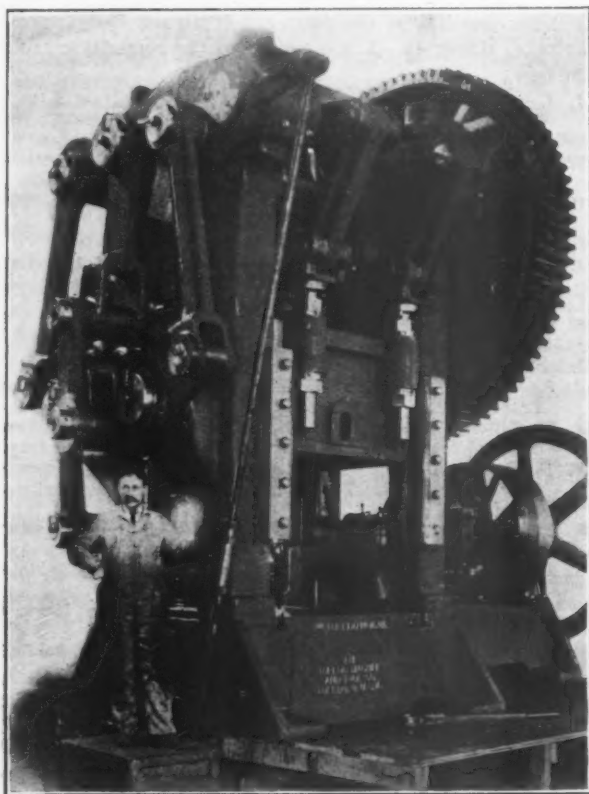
An Extremely Powerful Toggle Drawing Press, Built by the Toledo Machine & Tool Company, Toledo, Ohio.
